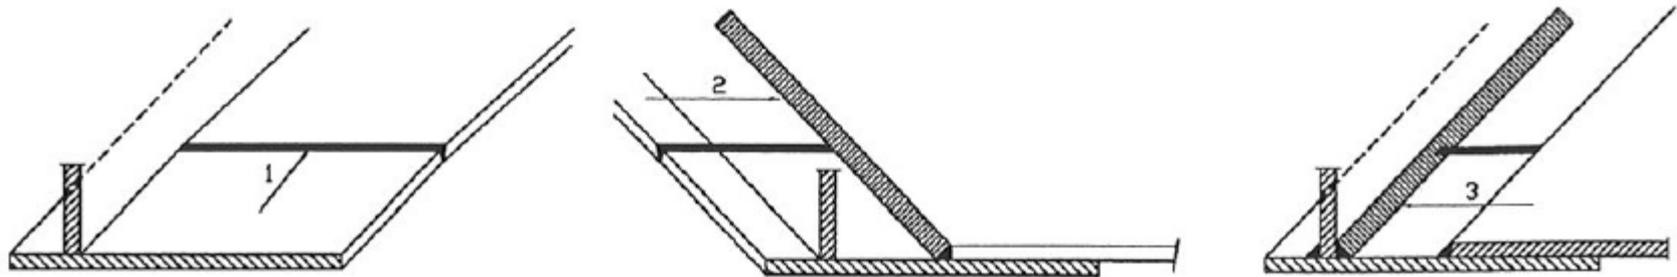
'K' seam where new annular plate radial welds cross rank shell
